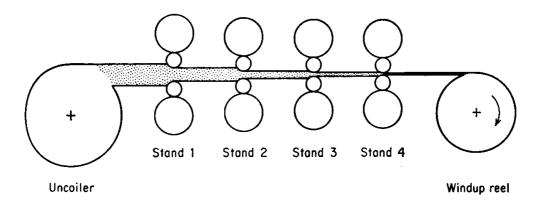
Schematic drawing of strip rolling on a four-stand continuous mill.
